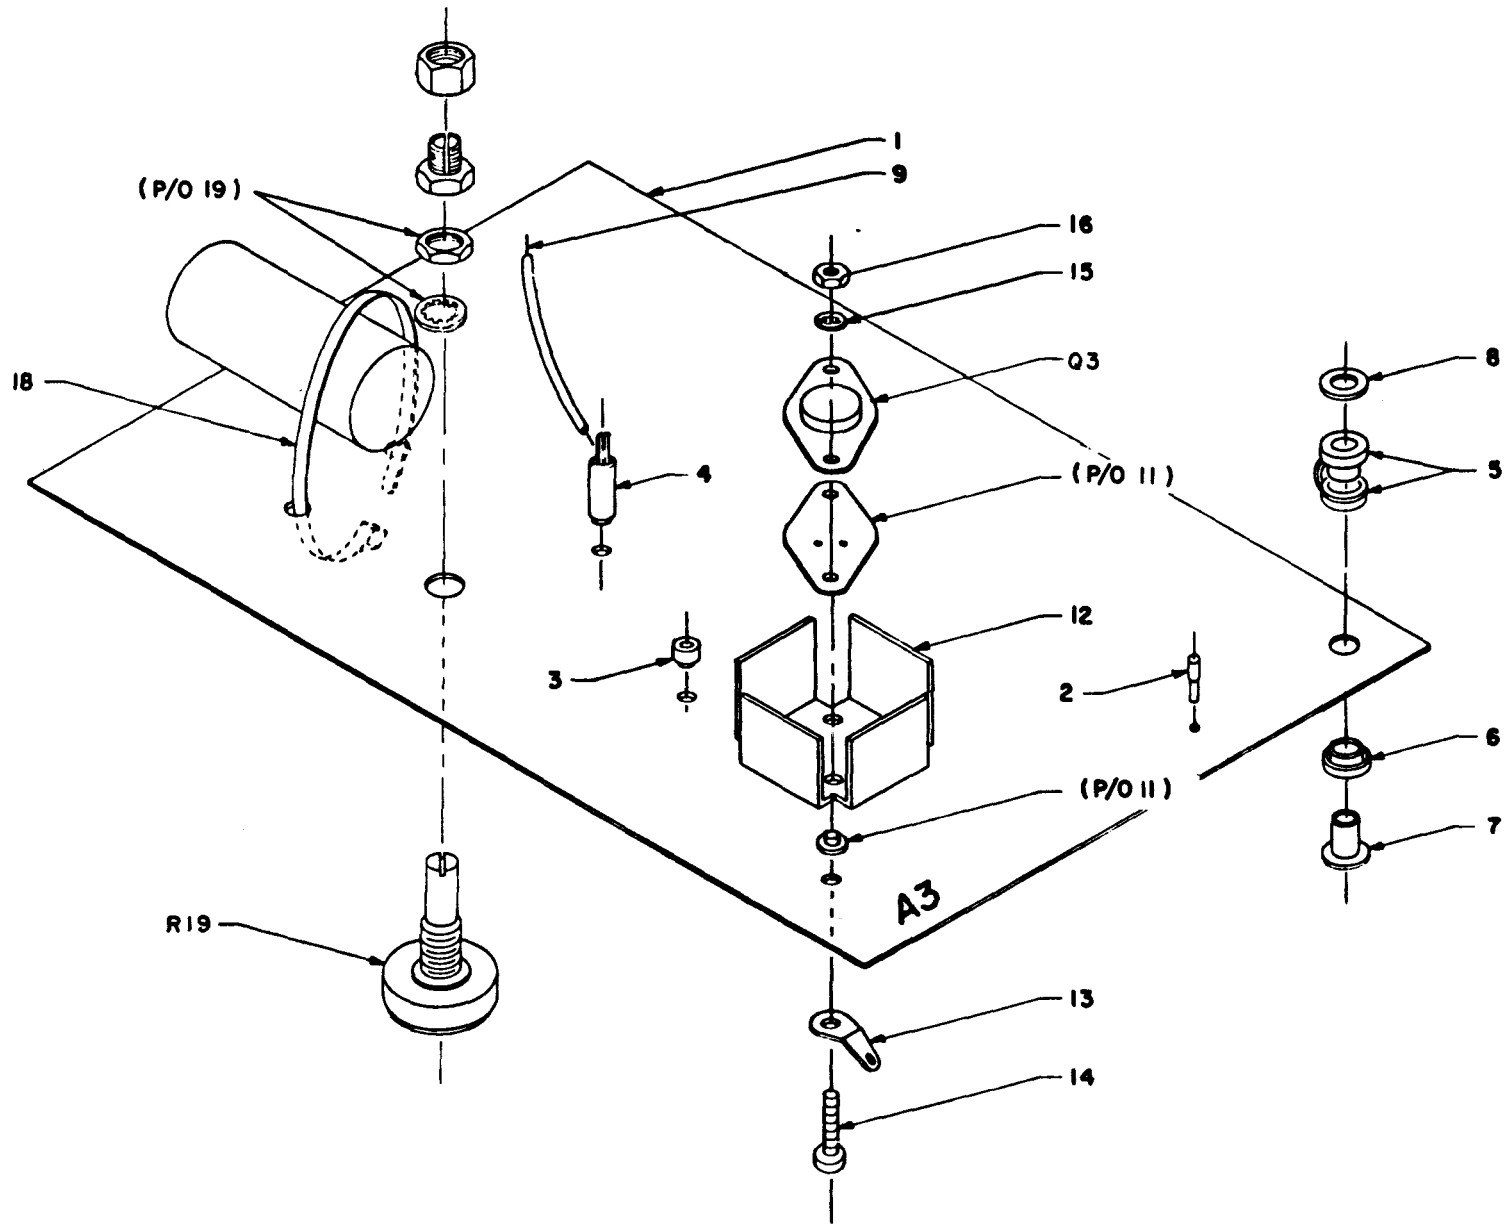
1,600 Volt Power Supply Assembly (A3) (Sheet 2 of 3).
